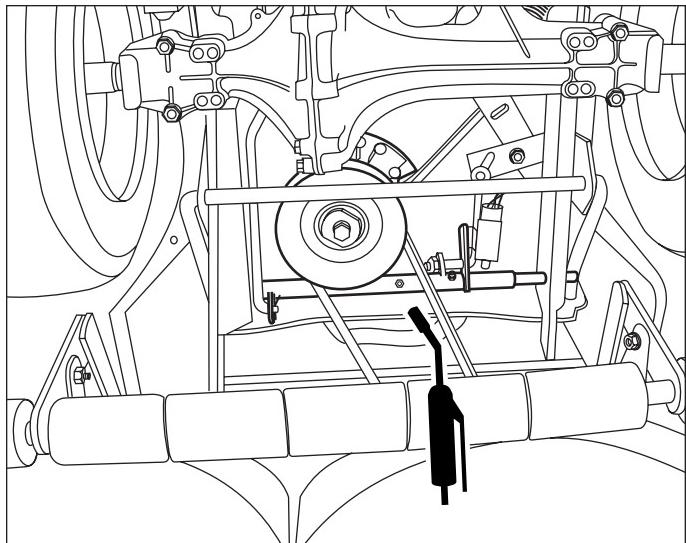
Rider Lubrication Points - Rear Half (Gear Model Shown)
